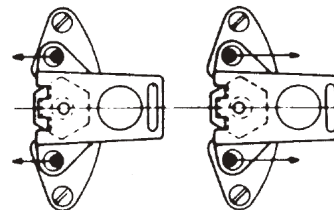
Incorrectly Aligned Guide Pin and Guide Pin Hole
